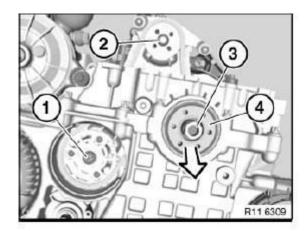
Removing Hub Courtesy of BMW OF NORTH AMERICA, INC.
